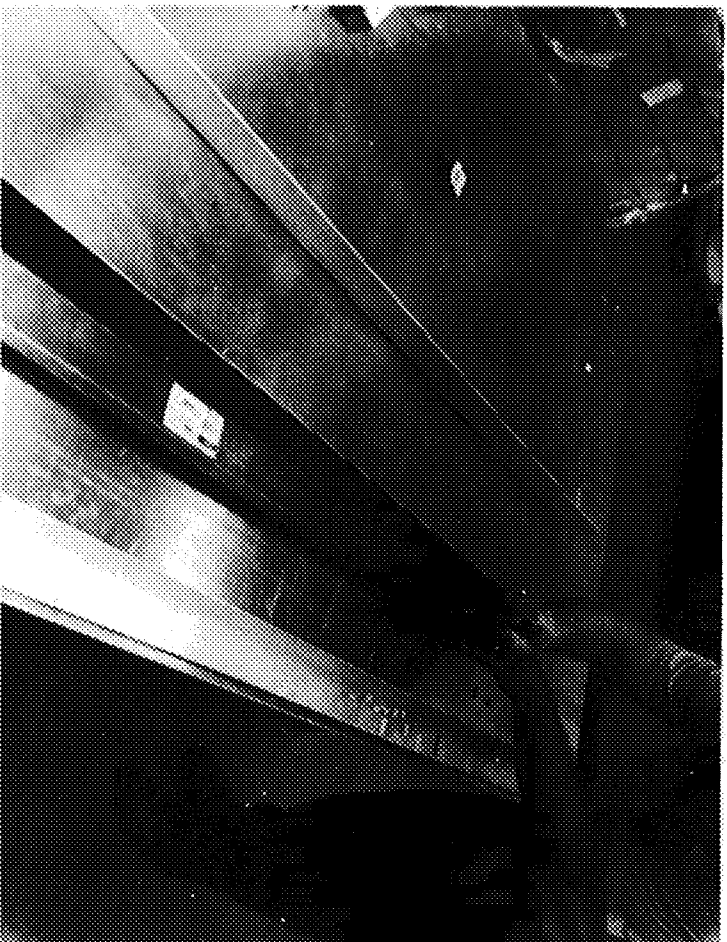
TRIMMING EDGES OF ABLATOR ASSEMBLY
